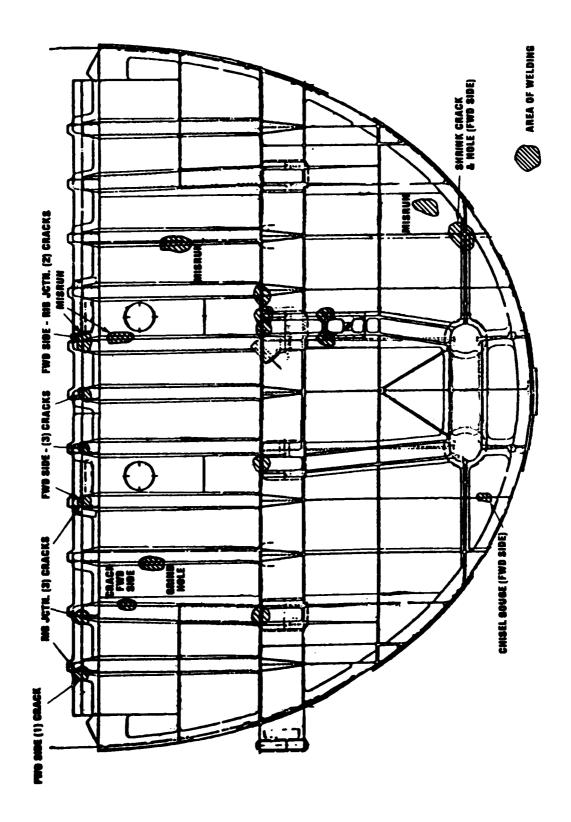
Weld Correction Locations - Bulkhead Casting M04
